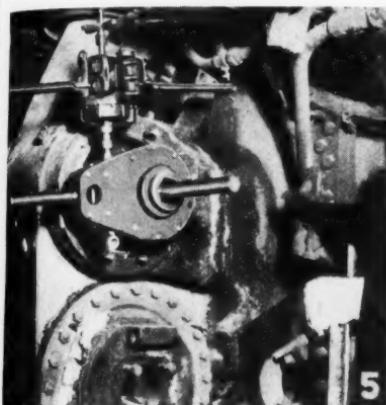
Using an air motor and gear reduction unit to pull a valve bushing into place.
